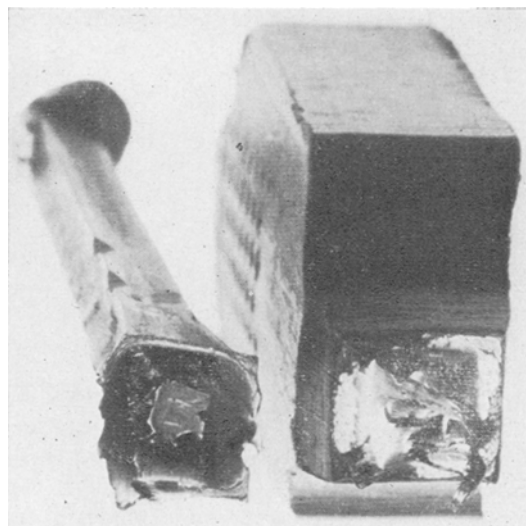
With the welding beads machined off, failure occurs at the end of the gauge length for Plastronga PE specimens welded using optimum conditions.
